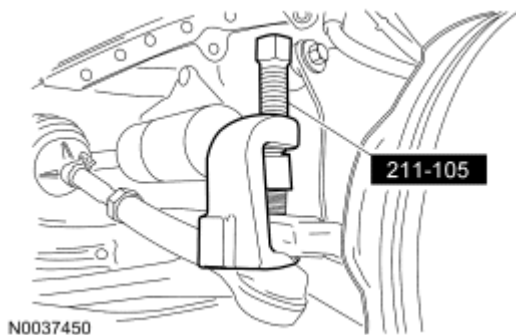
Separating Tie-Rod Ends From Wheel Knuckles Using Special Tool (211-105)
